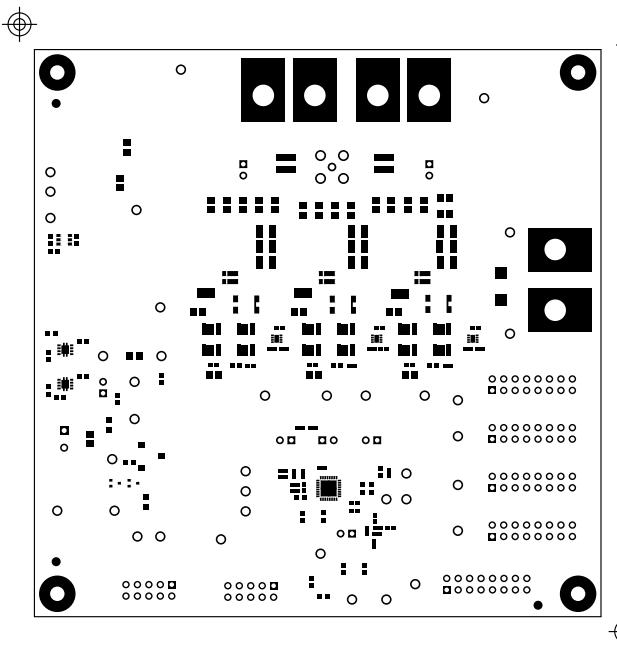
TPS59632Q1EVM-057 PCB Top Solder
